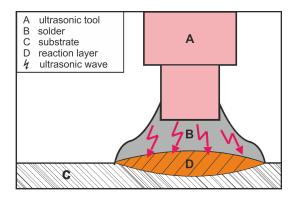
Ultrasonic soldering through the layer of molten solder.
